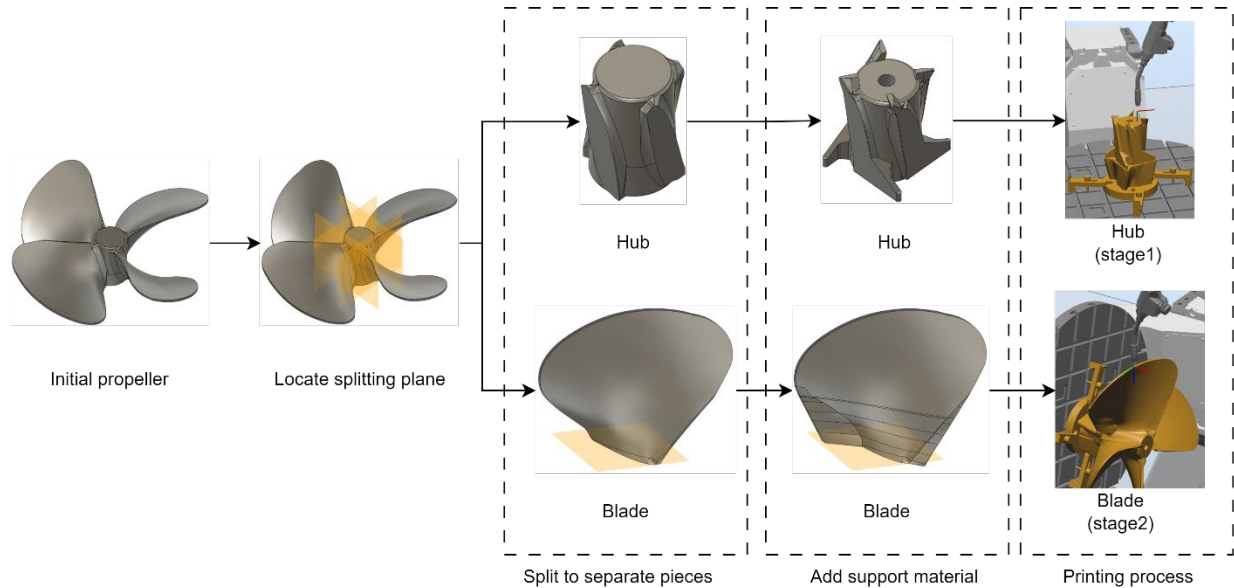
Stages and steps to print a propeller with multi-directional printing
